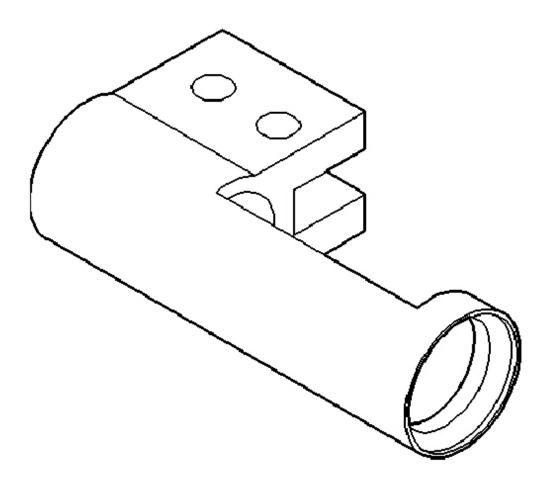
Spring Compressor Adapter 6526 Courtesy of CHRYSLER LLC
